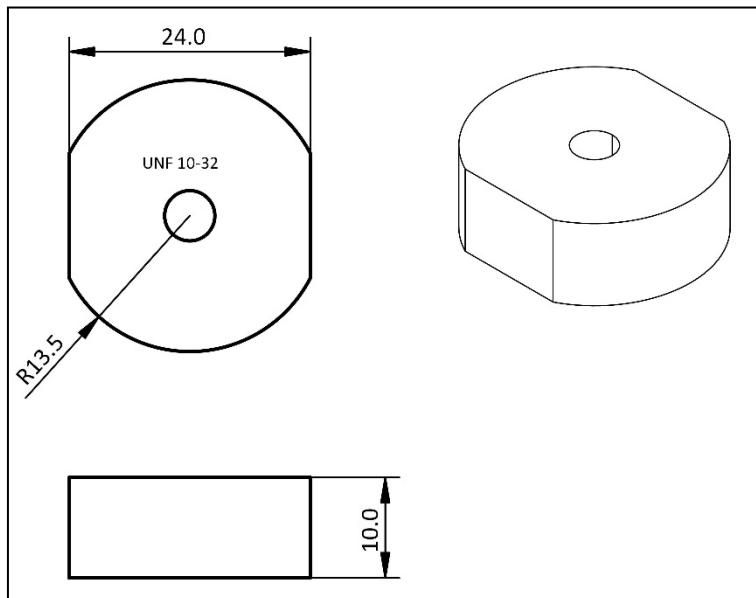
Drawing showing stainless steel adaptor dimensions. Drawing is not to scale.
